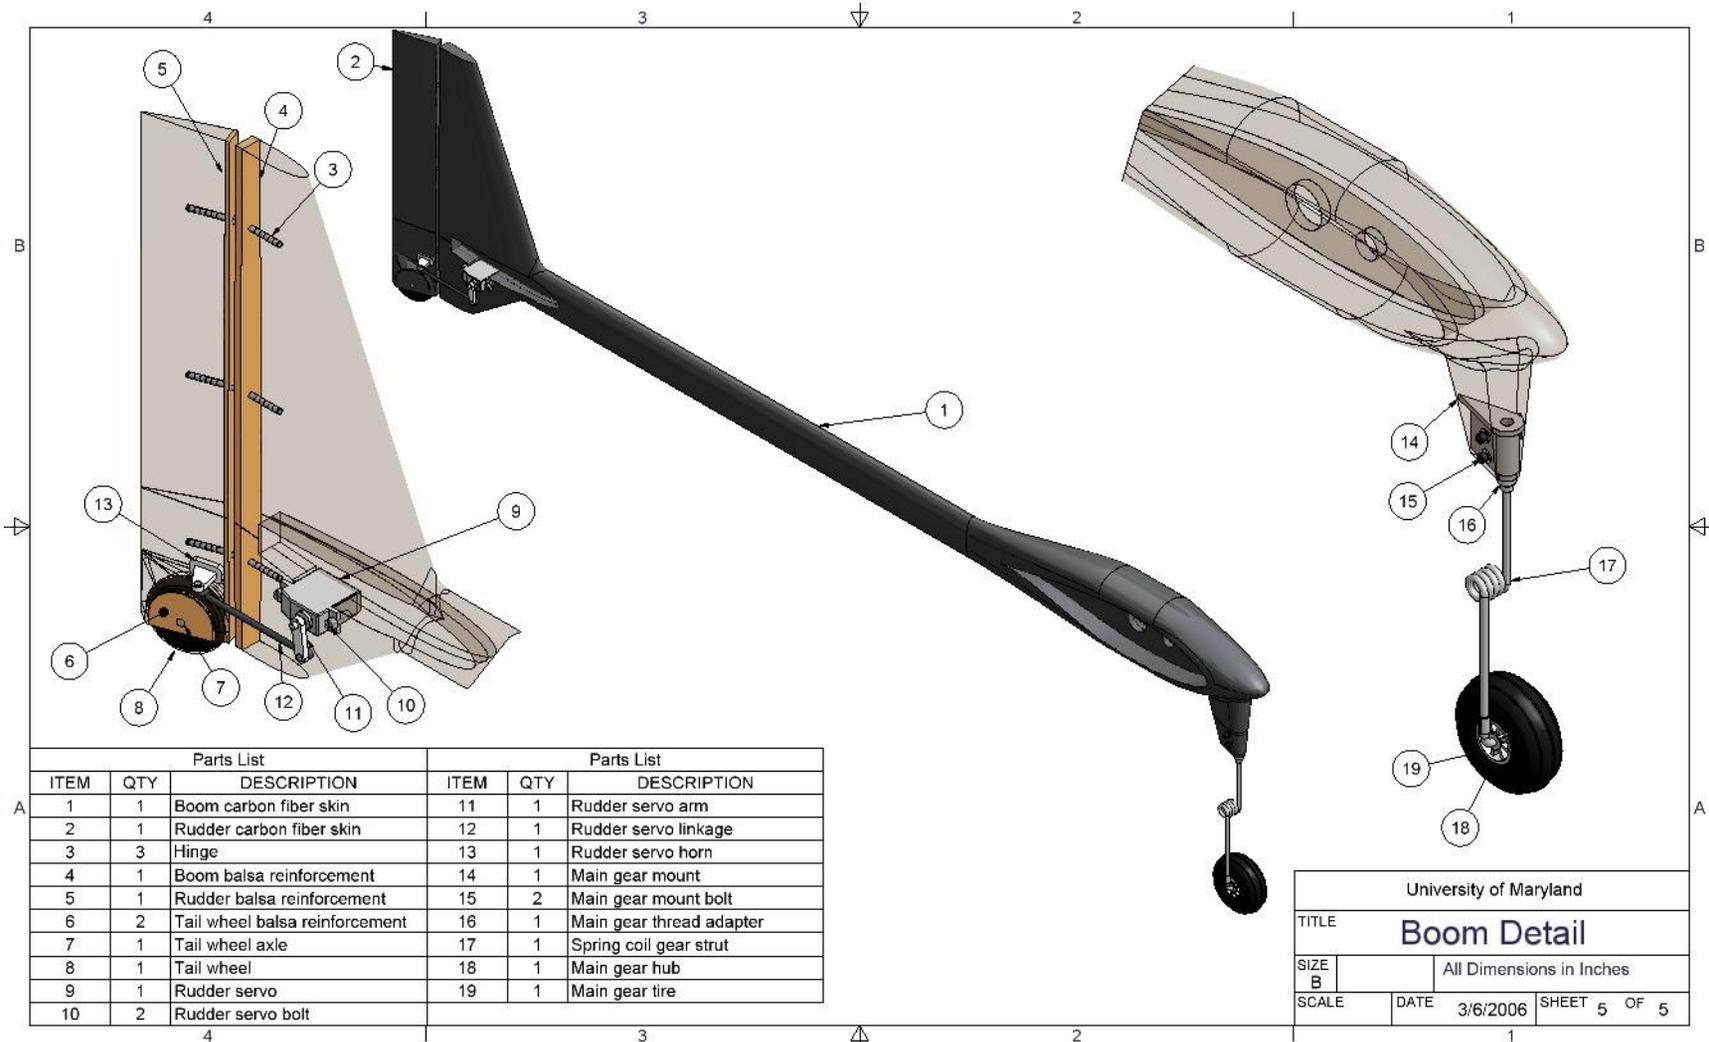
Detailed CAD Drawing – boom and rudder assembly.
